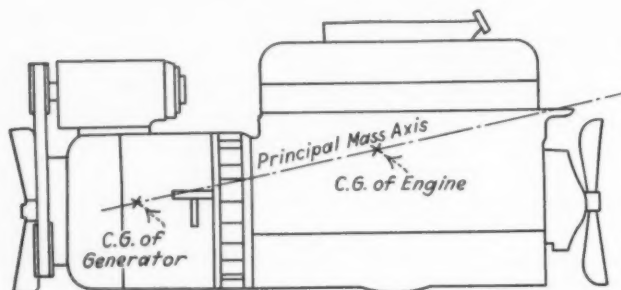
ARRANGEMENT OF DIESEL ENGINE AND GENERATOR FOR MOUNTING AT REAR OF BUS SHOWING LOCATION OF PRINCIPAL MASS AXIS
